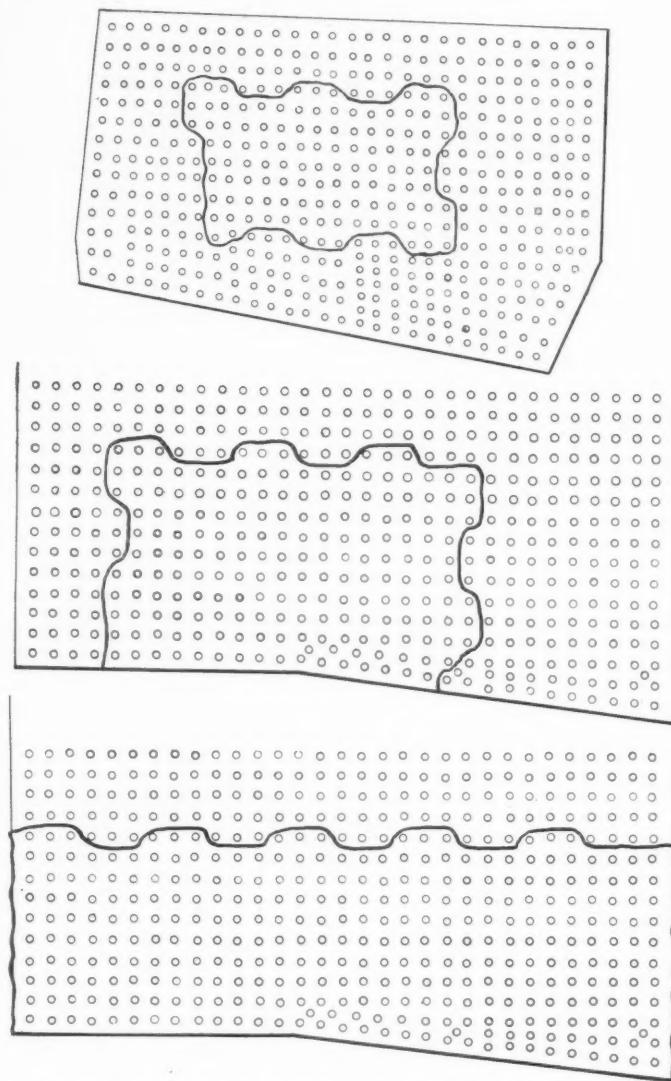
Serpentine Seams as Applied to Patches and Half Side Sheets
